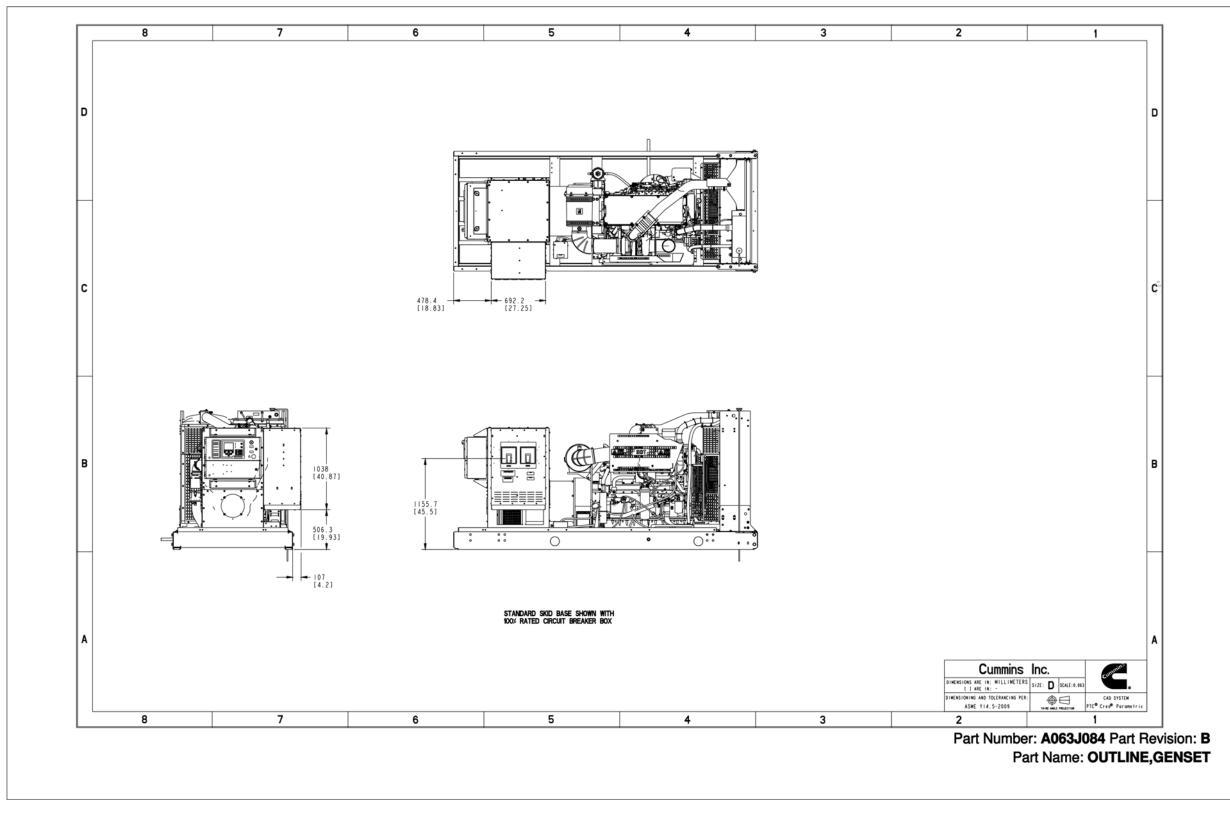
GENERATOR SET OUTLINE DRAWING (SHEET 4 OF 4)
